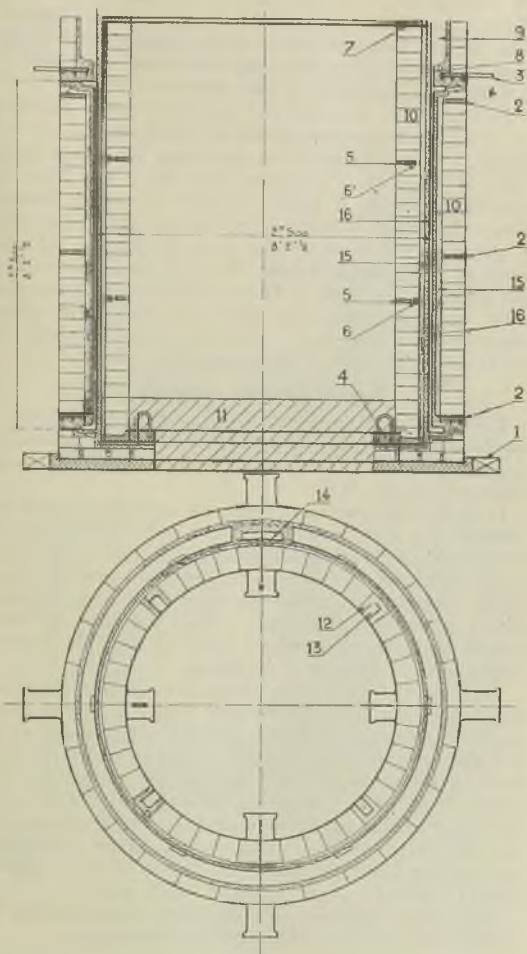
PLAN AND SECTION OF A CALENDER LOAM MOULD.
